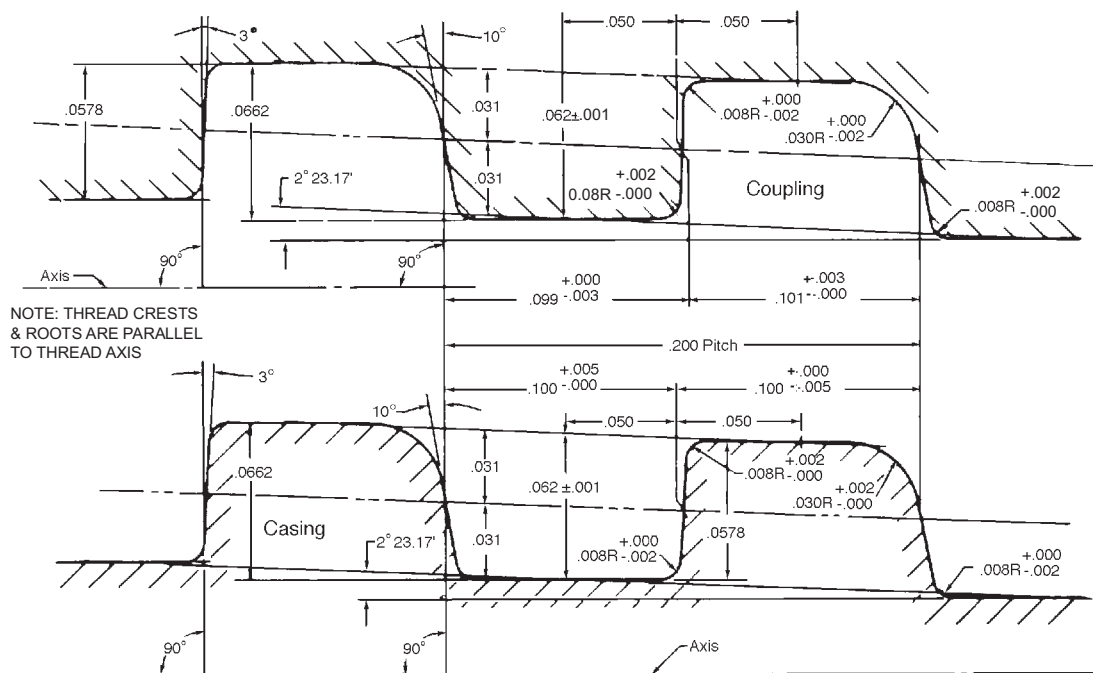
Buttress Casing Thread Form and Dimensions—for Casing Sizes 16 and Larger
